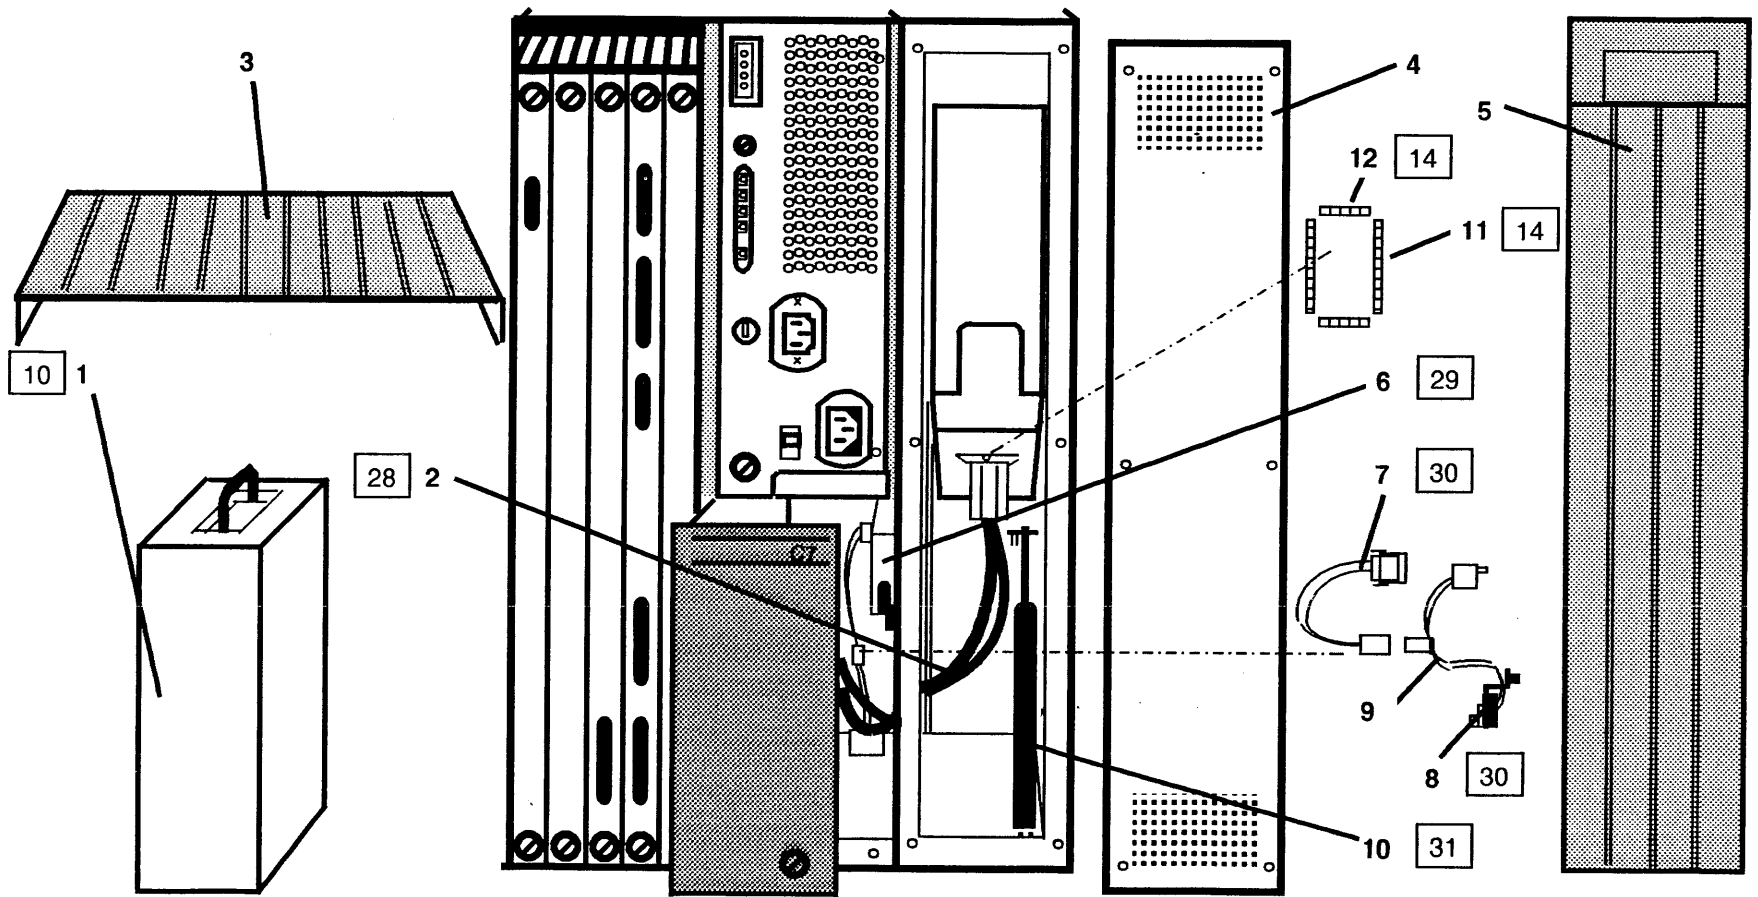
Removable Rigid Disk Drive Processor - Unique Components
